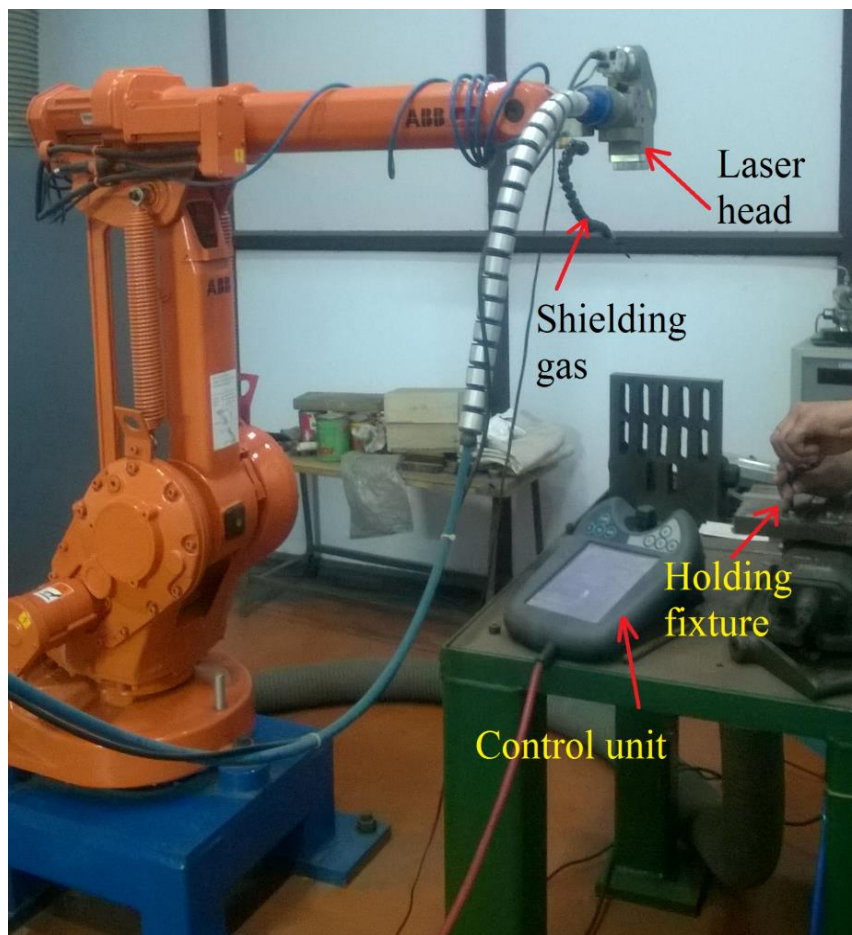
Nd:YAG laser machine setup for laser welding
